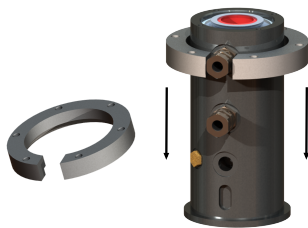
Slit mounting flange for Safety Catchers with compressive load direction (KR and KRP series)
